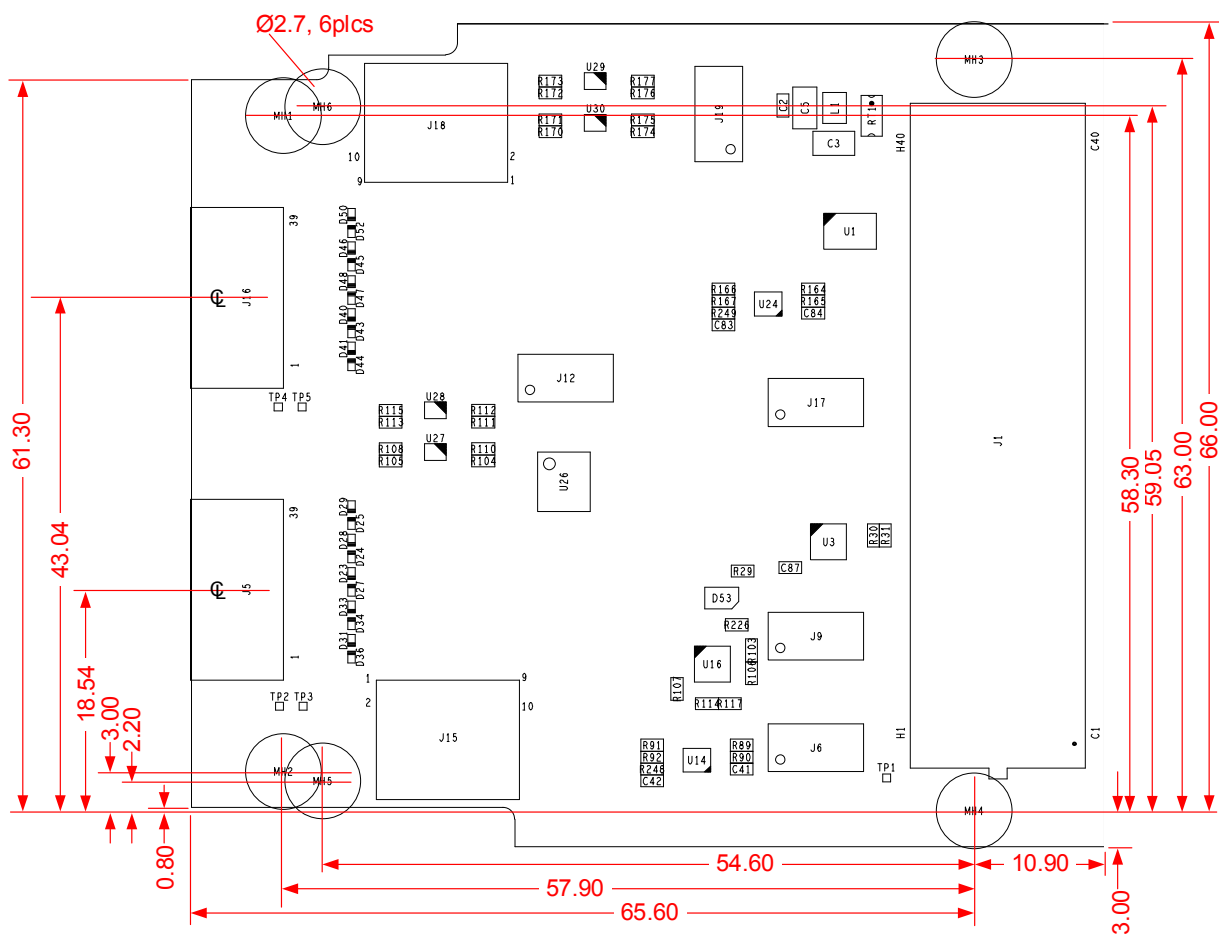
TB-FMCL-MIPI-DIRECT Board Dimensions (mm)
